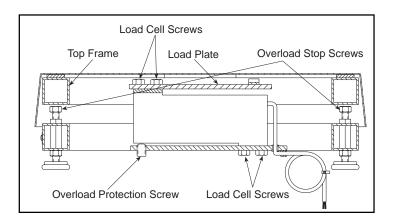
12", 18", and 24" Checkweigher base in 100 - 1,000 lb
